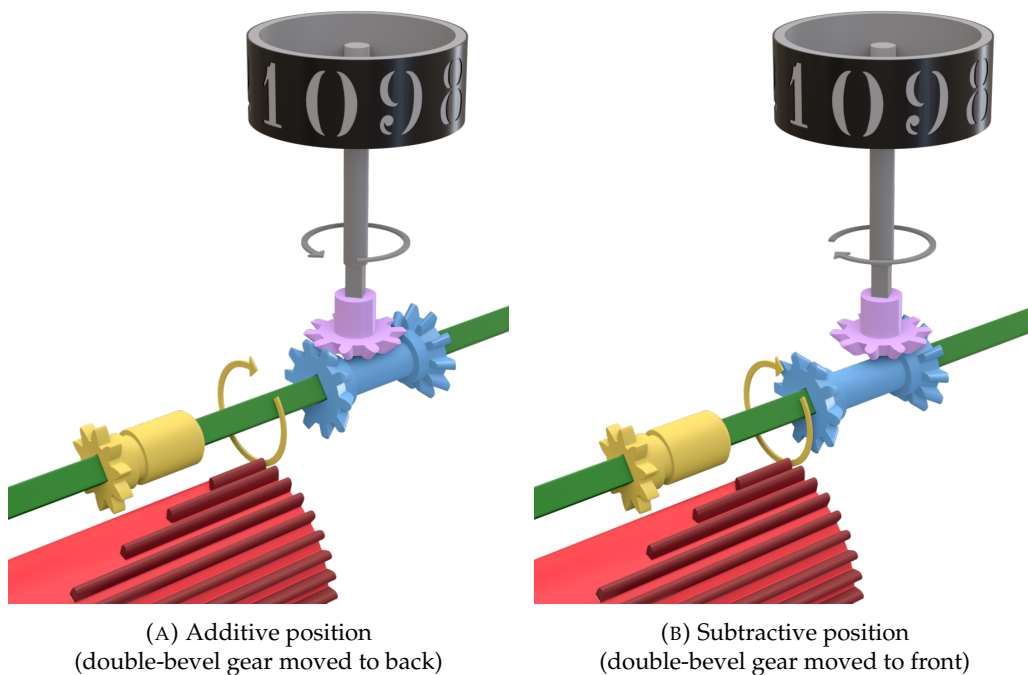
The double-bevel gear mechanism [Nöhre, 2023]
